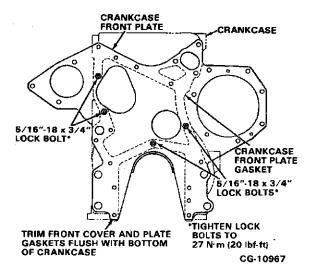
Front Plate and Front Plate Gasket Installation to Crankcase
